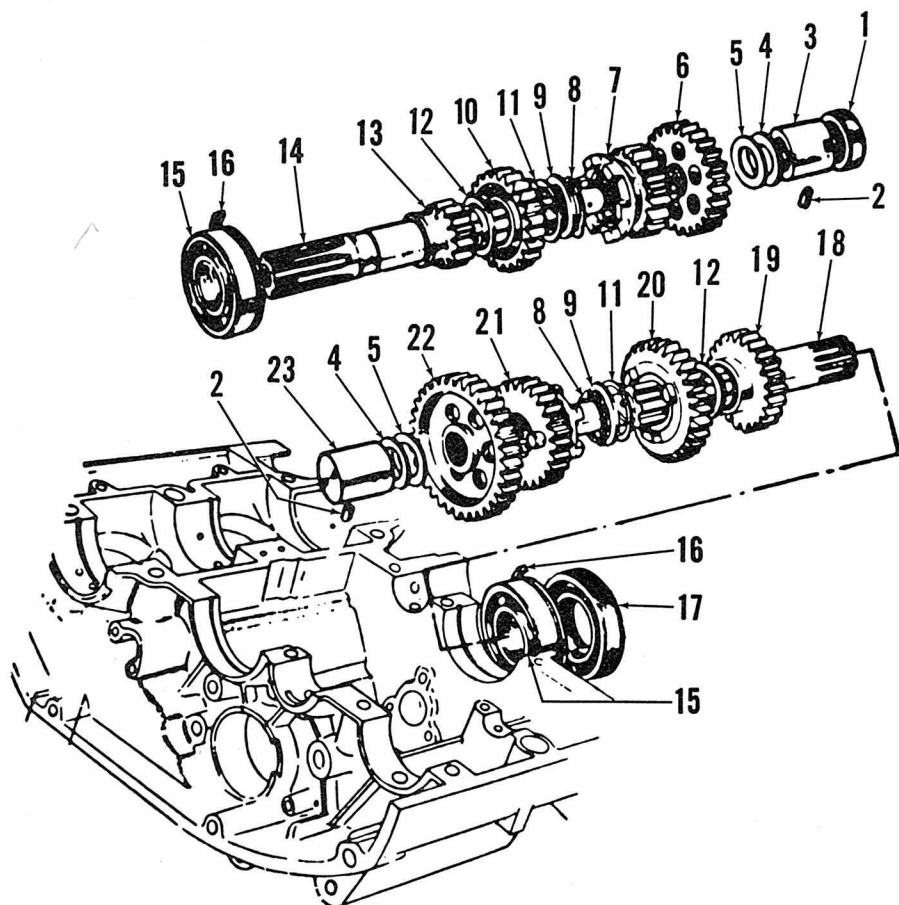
Exploded view of S32-2 transmission assembly. T10 transmission is similar.
